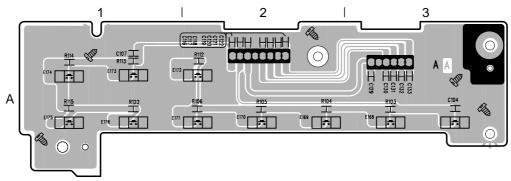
EU03B Front (L) PC Broad (Bottom side)
